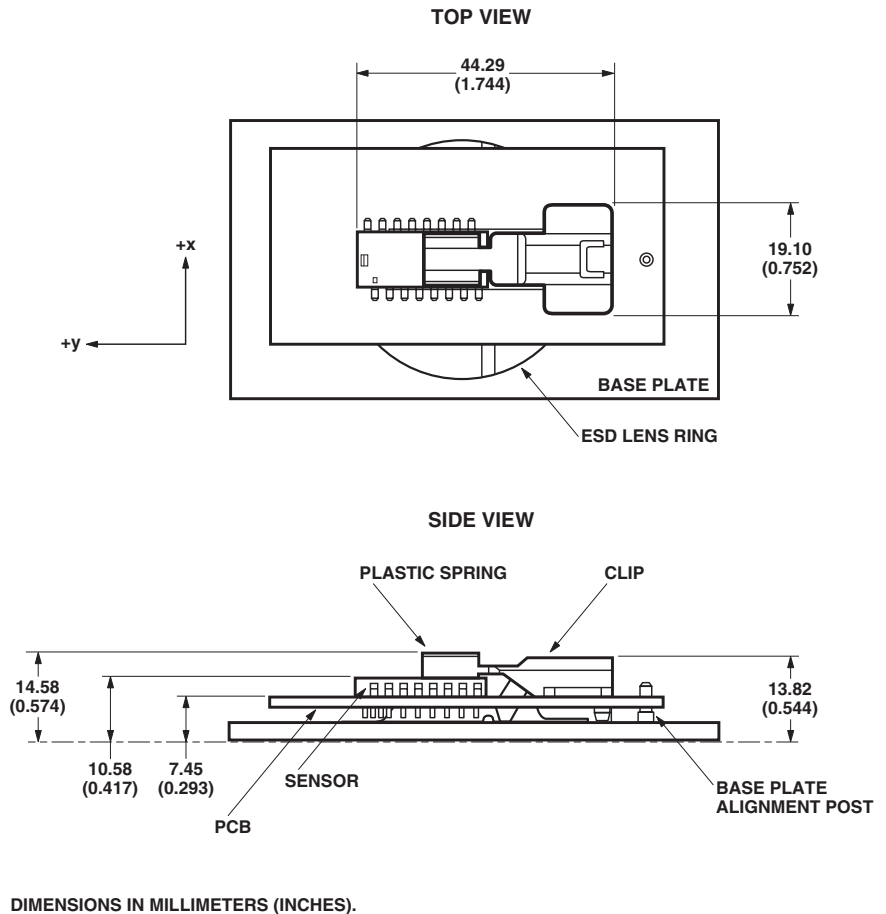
2D assembly drawing of ADNS-2051 (top and side view)
